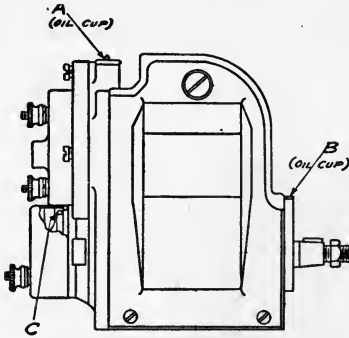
Side view of Aero magneto showing points to be oiled.
